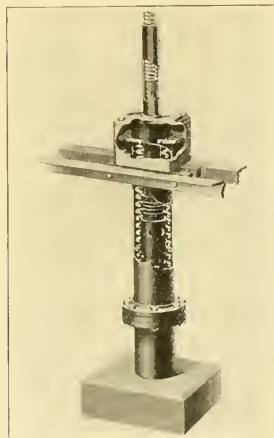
DETAIL VIEW OF CAR BUFFER OF THE SPRING RETURN TYPE
